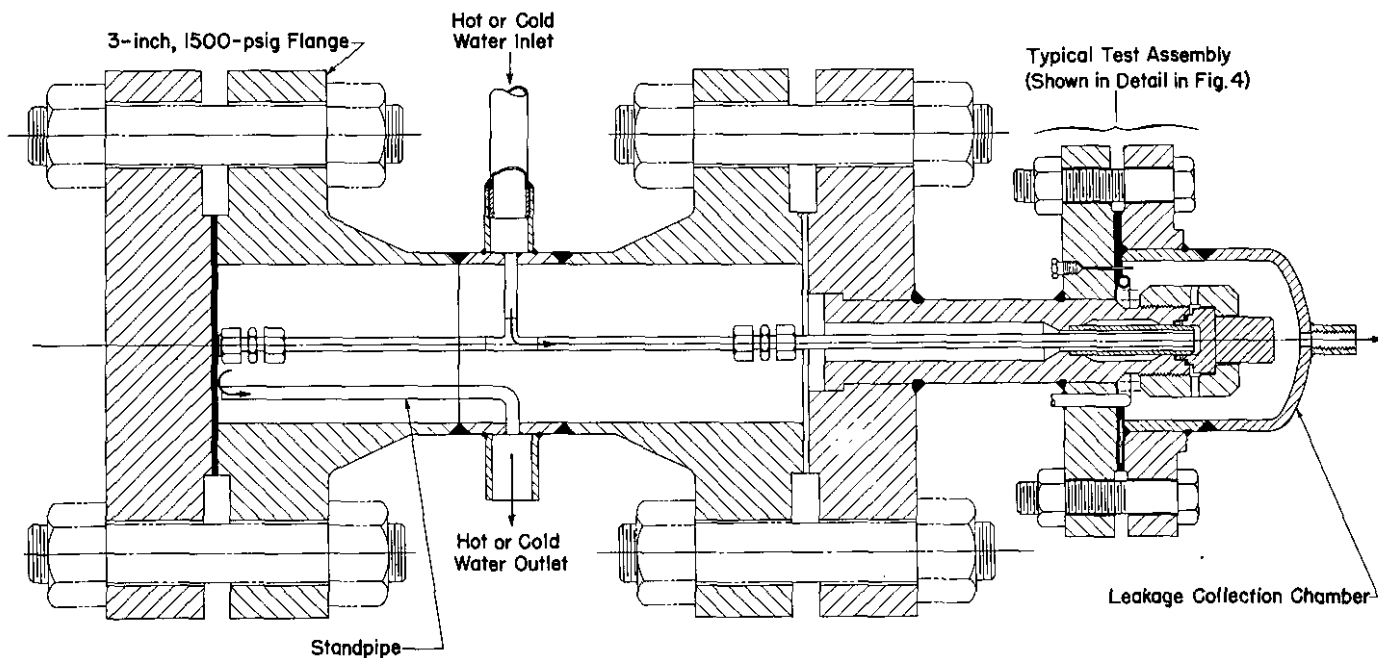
TYPICAL TEST UNIT SHOWING GASKETED JOINT OF INSTRUMENT PIN IN LOWER TEST POSITION
